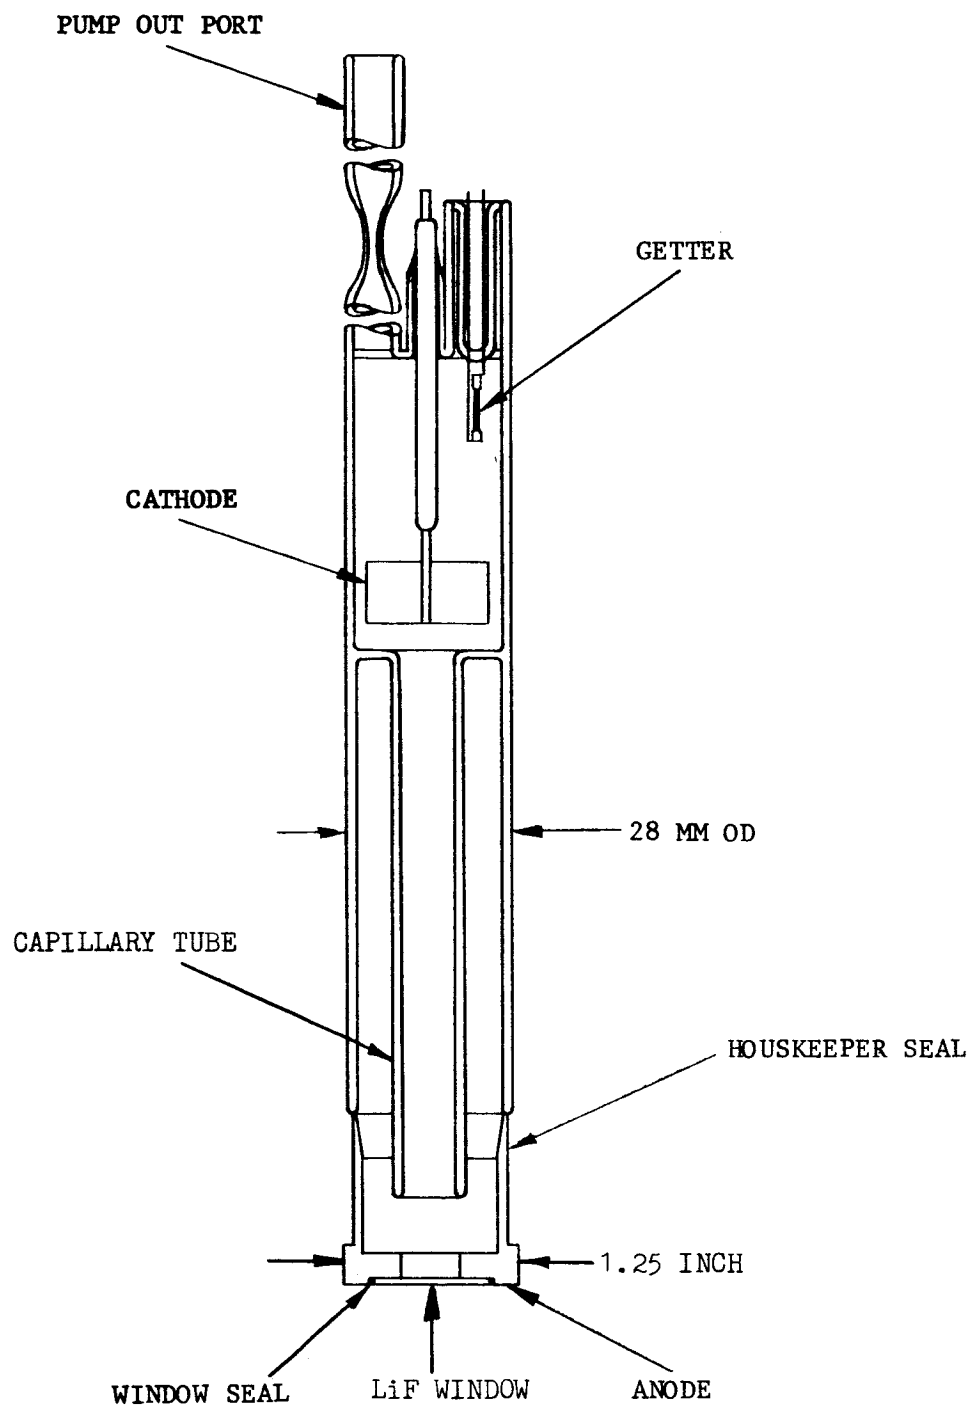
CROSS SECTIONAL VIEW OF MOD-D TUBE
